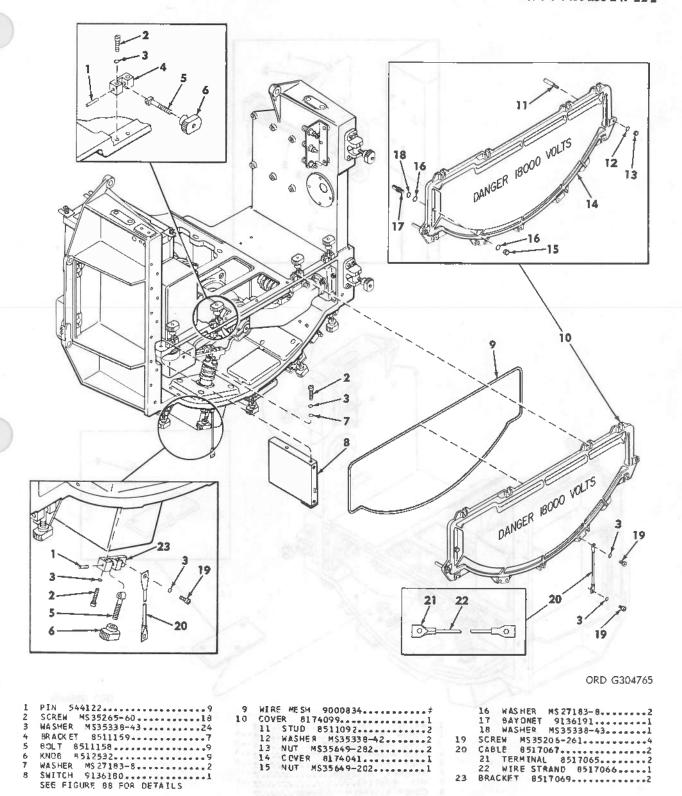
MCDULATOR /8172445/-PARTIAL EXPLODED VIEW /SEE FIGURE 76 FOR NEXT HIGHER ASSEMBLY/
